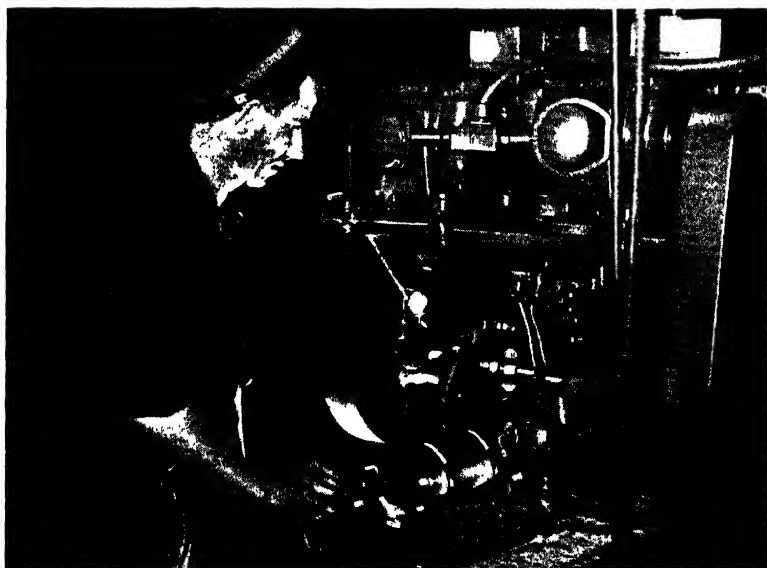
Milling Two Woodruff Keyways In an Automobile Crankshaft
